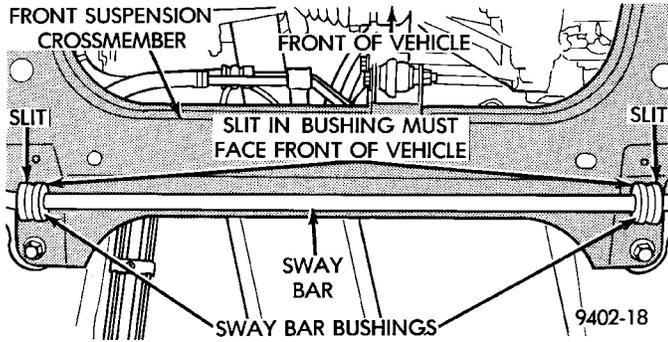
Correct Stabilizer Bar To Crossmember Bushing Installation
